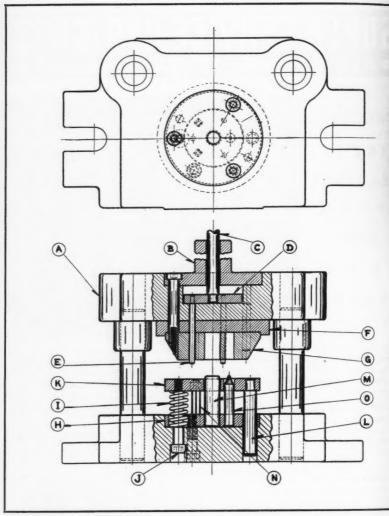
Drawing showing Design of Combination Lancing, Bending and Hubbing Die that Produces the Blank Illustrated in Fig. 1.
